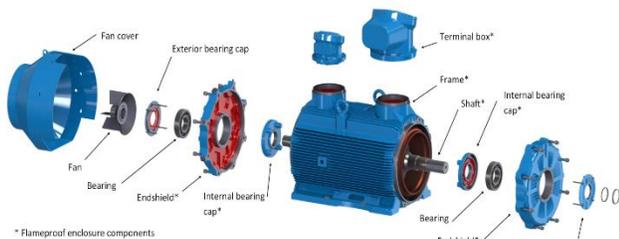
Exploded view of a motor assembly with identification of flameproof components
